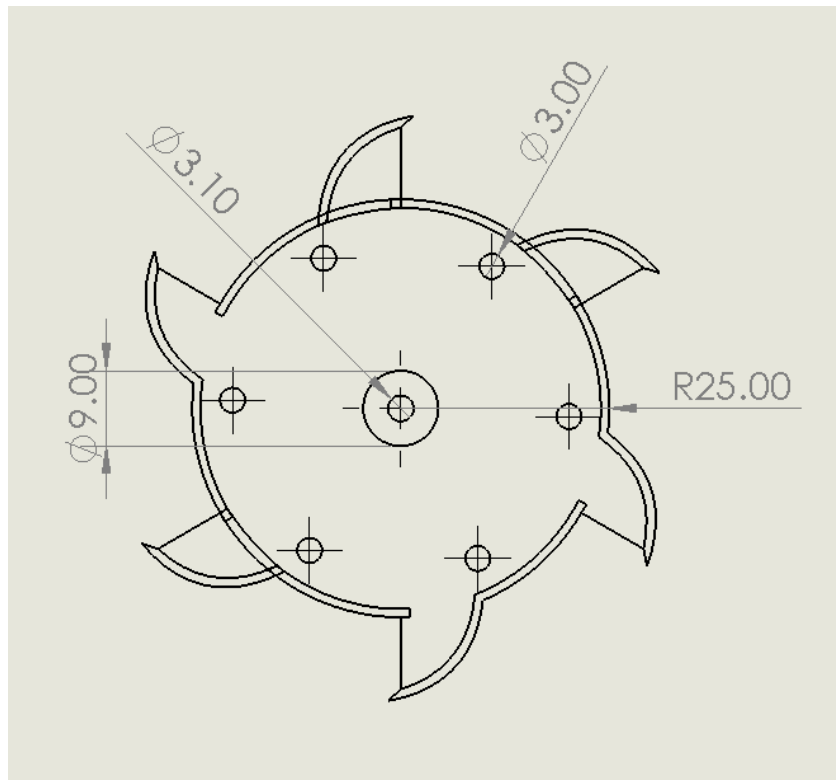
Drawing of the wheel with the relevant dimensions
